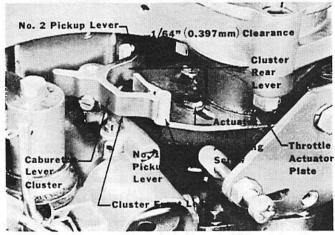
Carburetor Throttle Pickup Plate Adjustment
